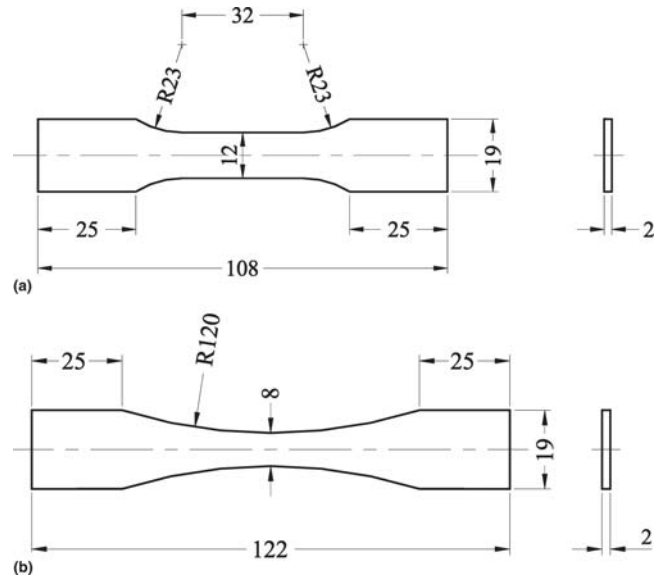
Schematic of (a) tensile specimen and (b) fatigue specimen (dimensions are in millimeters)
